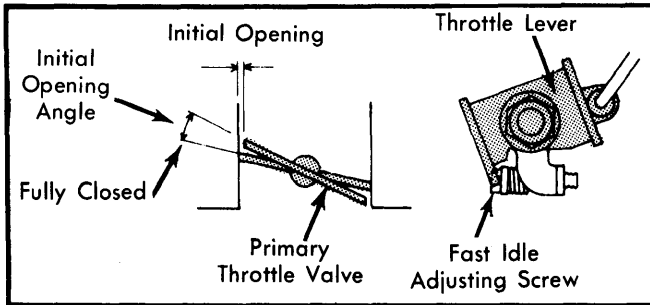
Adjusting Throttle Valve Initial Opening Angle
